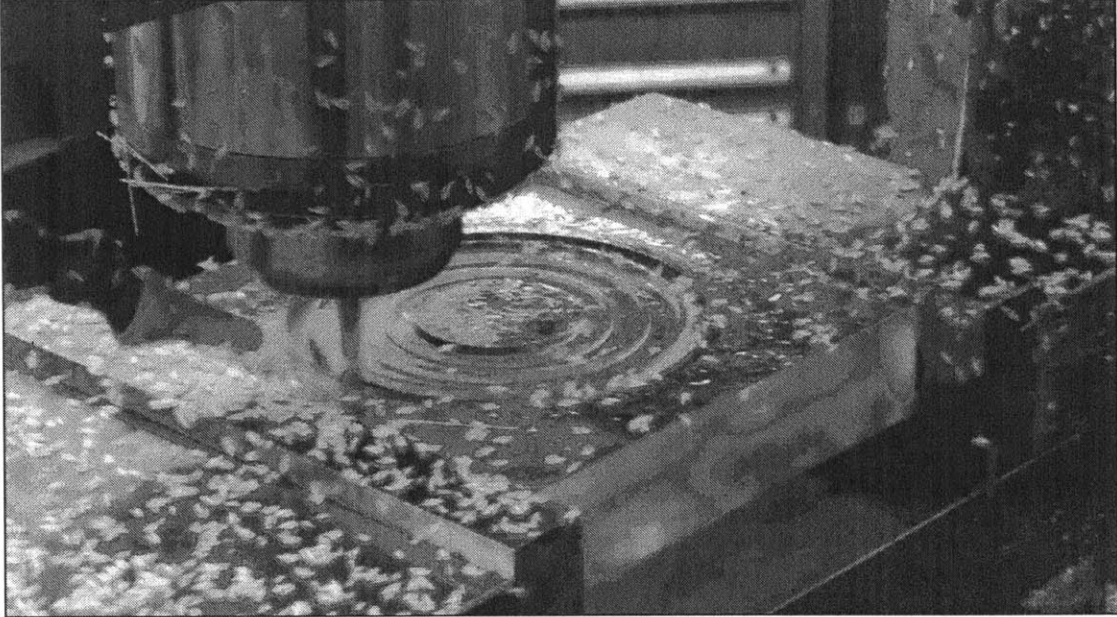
Milling of the polycarbonate liquid metal holder.
